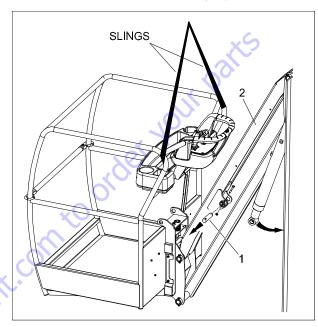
Jib Cylinder Removal - Figure 1 of 2
